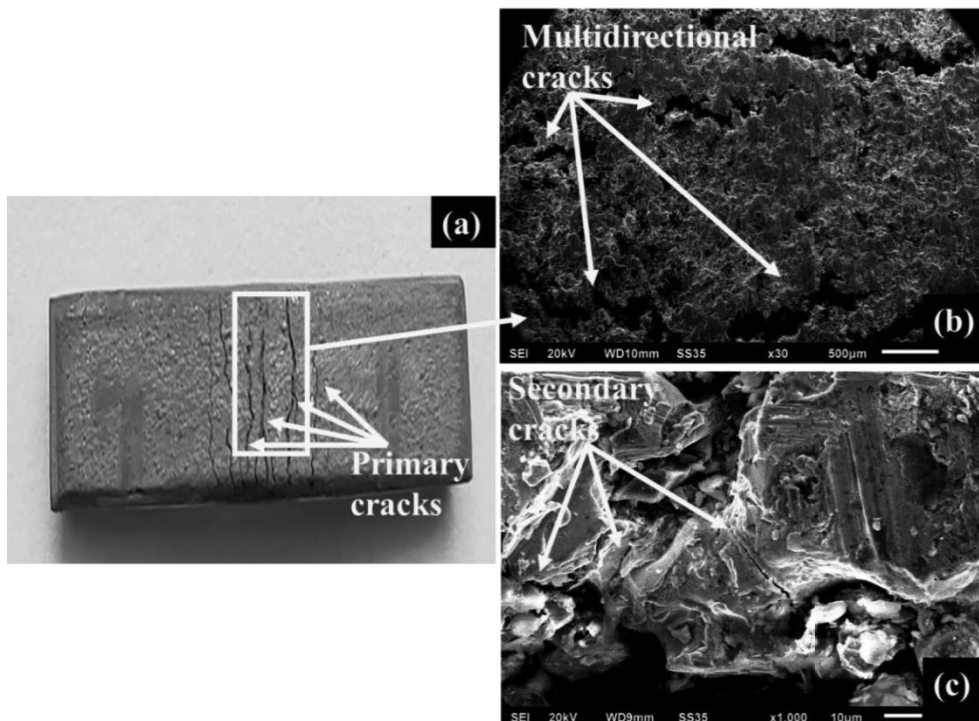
Fractured EWAC-15Al₂O₃ clad specimen after 3-point bend test (a) Photograph of the top surface; SEM micrograph showing (b) primary cracks (c) secondary cracks
